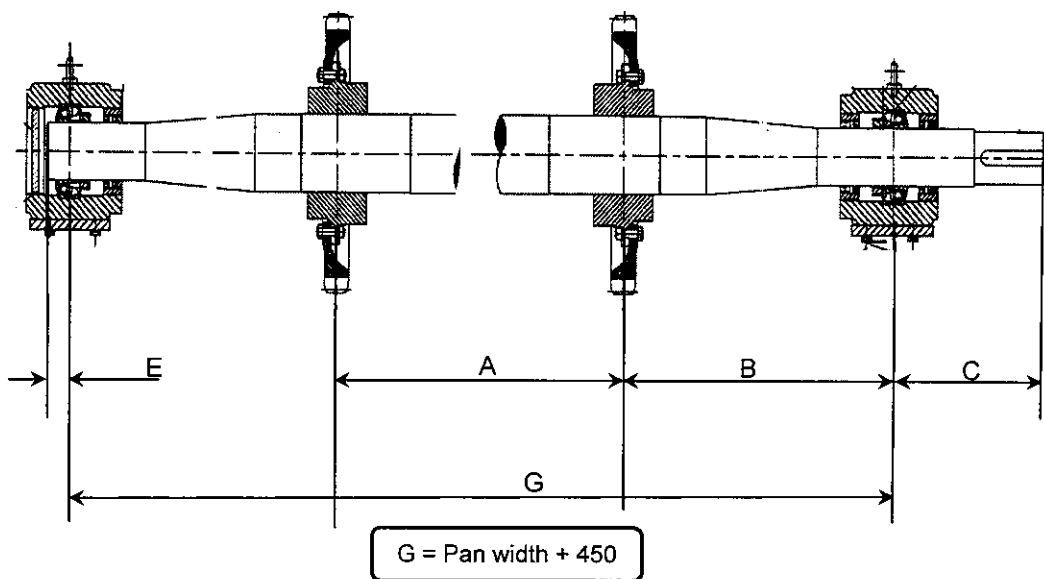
Relation for location of subassemblies in Direct type Drive Wheel Assembly
